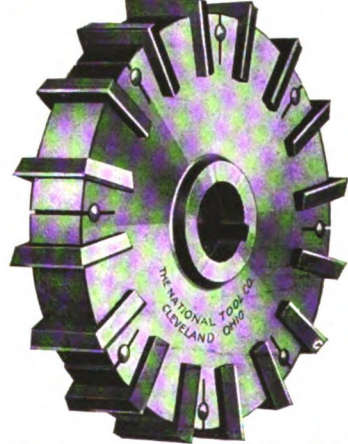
Inserted Tooth Side Milling Cutter with Straight Hole
